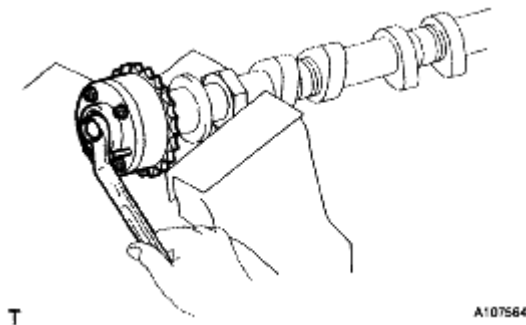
Tightening Flange Bolt With Camshaft Timing Exhaust Gear Fixed
